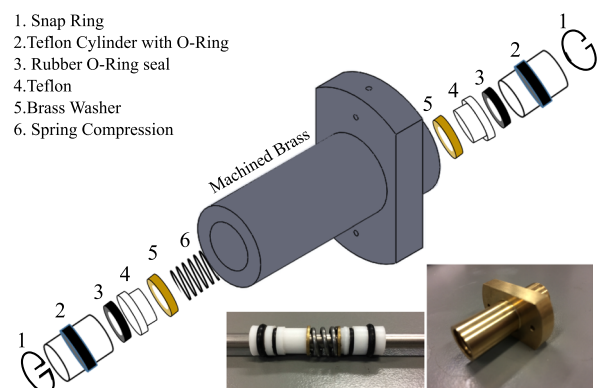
Vacuum seal assembly for two port SQUID-FMR module.
